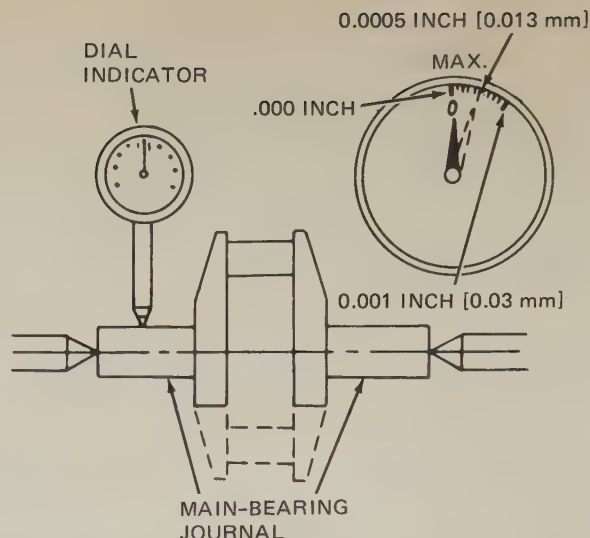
Using a dial indicator to check main-bearing journals. (Tecumseh Products Company)
